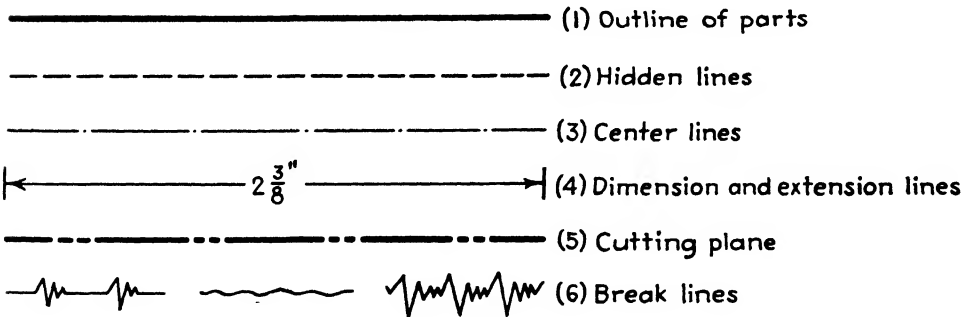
Alphabet of principal lines used in drawing and sketching.
